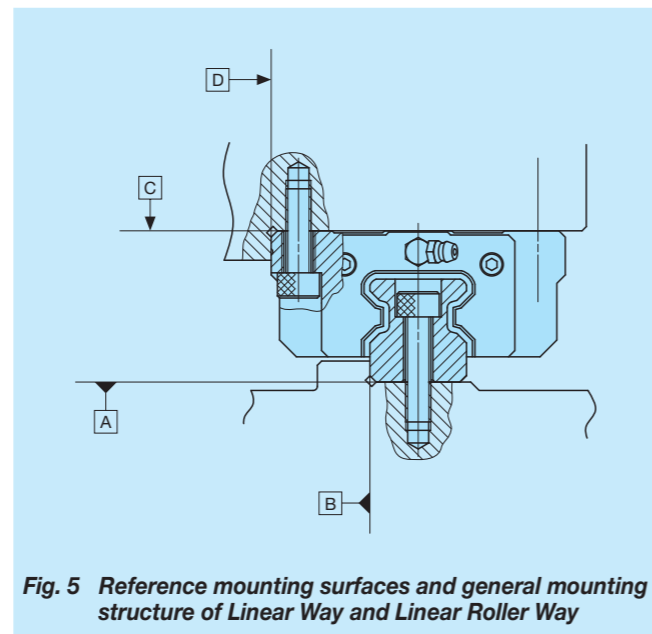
Reference mounting surfaces and general mounting structure of Linear Way and Linear Roller Way
